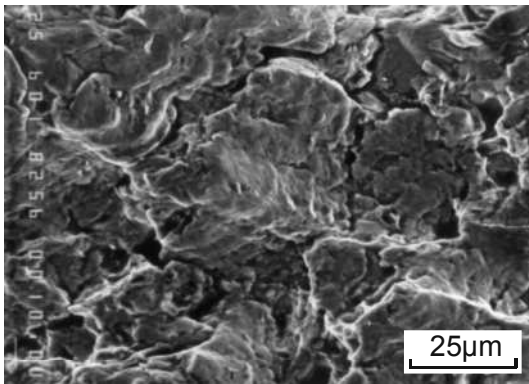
Variant A specimen fatigue fracture after fatigue tests ( $\Delta\epsilon_f=0.8\%$ ) at 20°C. Transcrystalline ductile fracture
